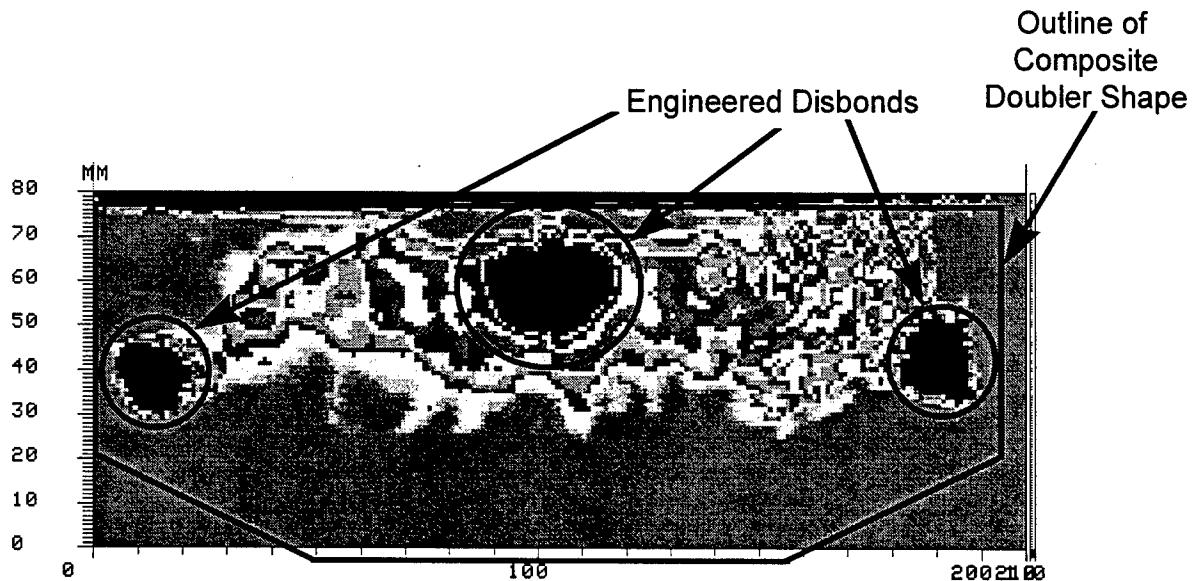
Thru-Transmission Ultrasonic Inspection Results of Composite Doubler Fatigue Specimen with Engineered Flaws
